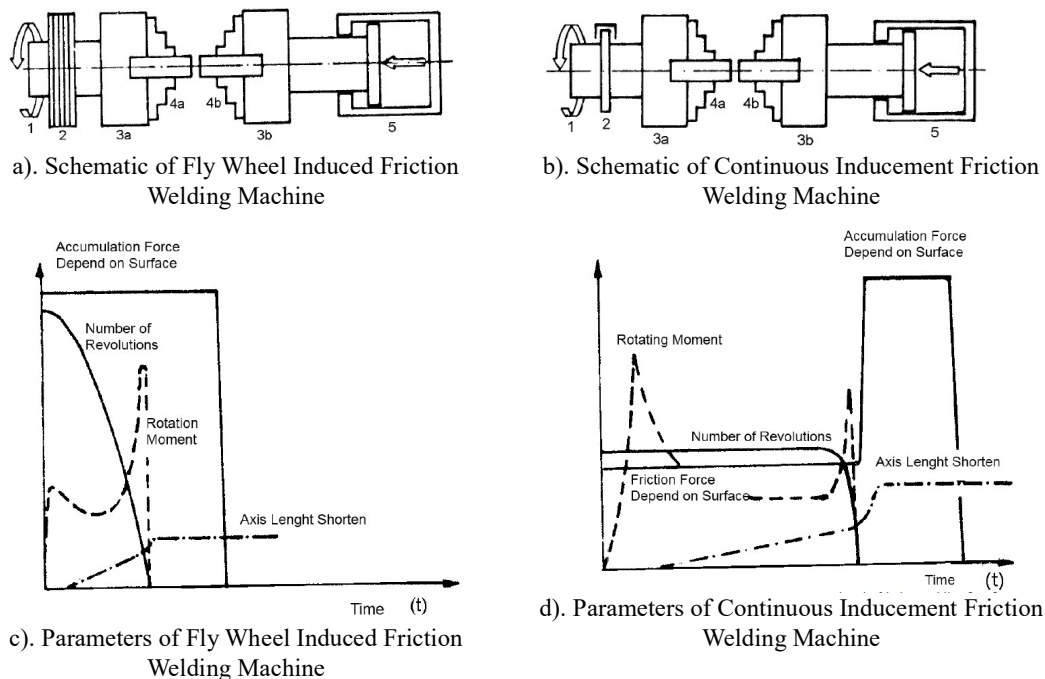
Two Type of Frition Welding ^{[4][5]}
